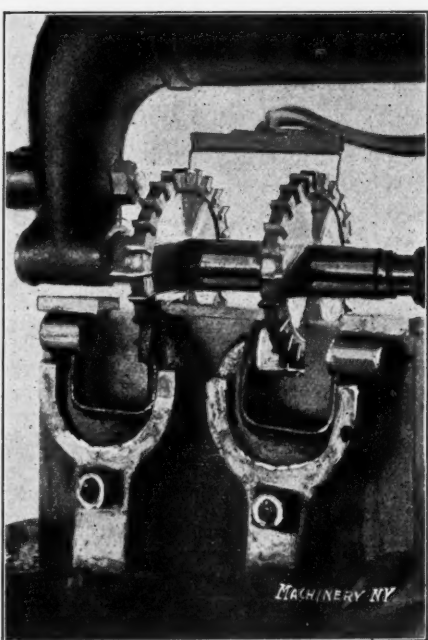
Fixture which holds Two C-clamps while Faces are being milled
